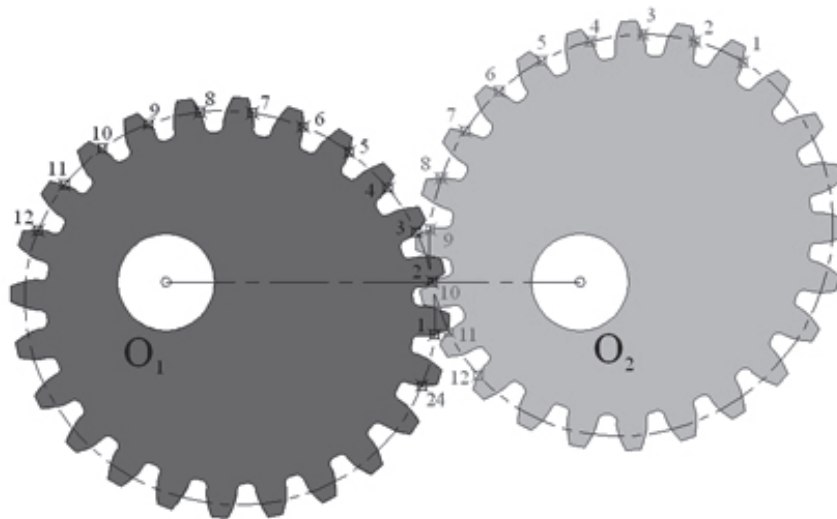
Mesh gearing for teeth No. 2 and No. 10
